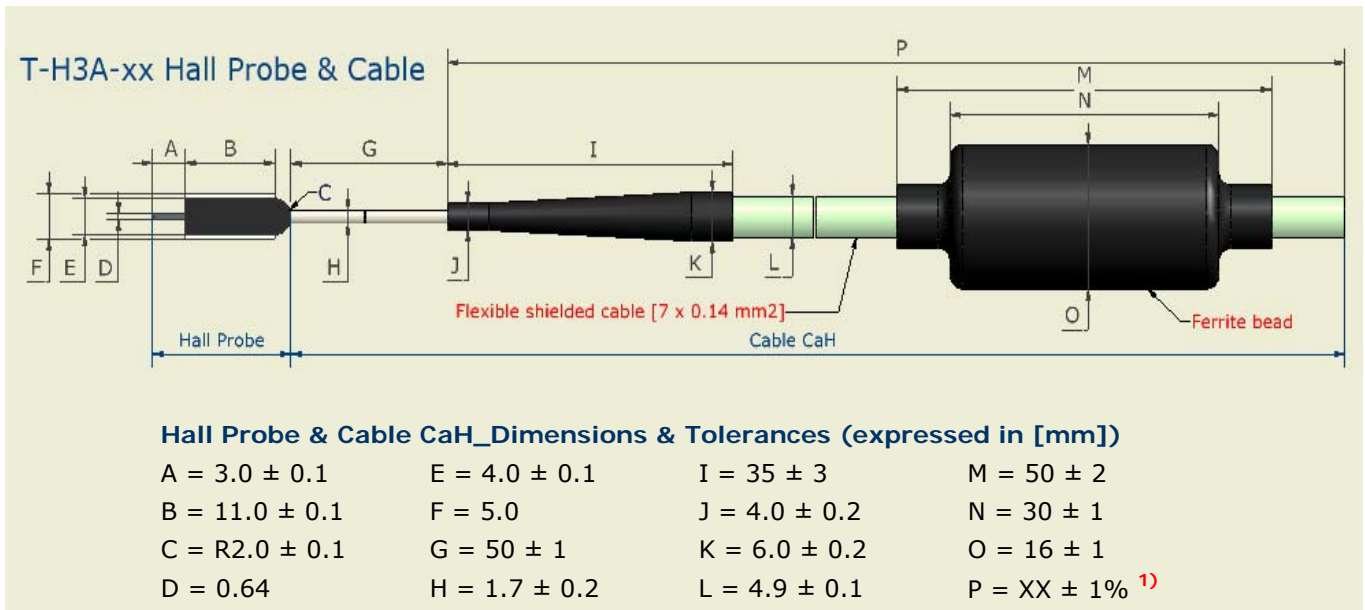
The dimensions of SENIS T-H3A-xx Hall probe and cable (Module H)
